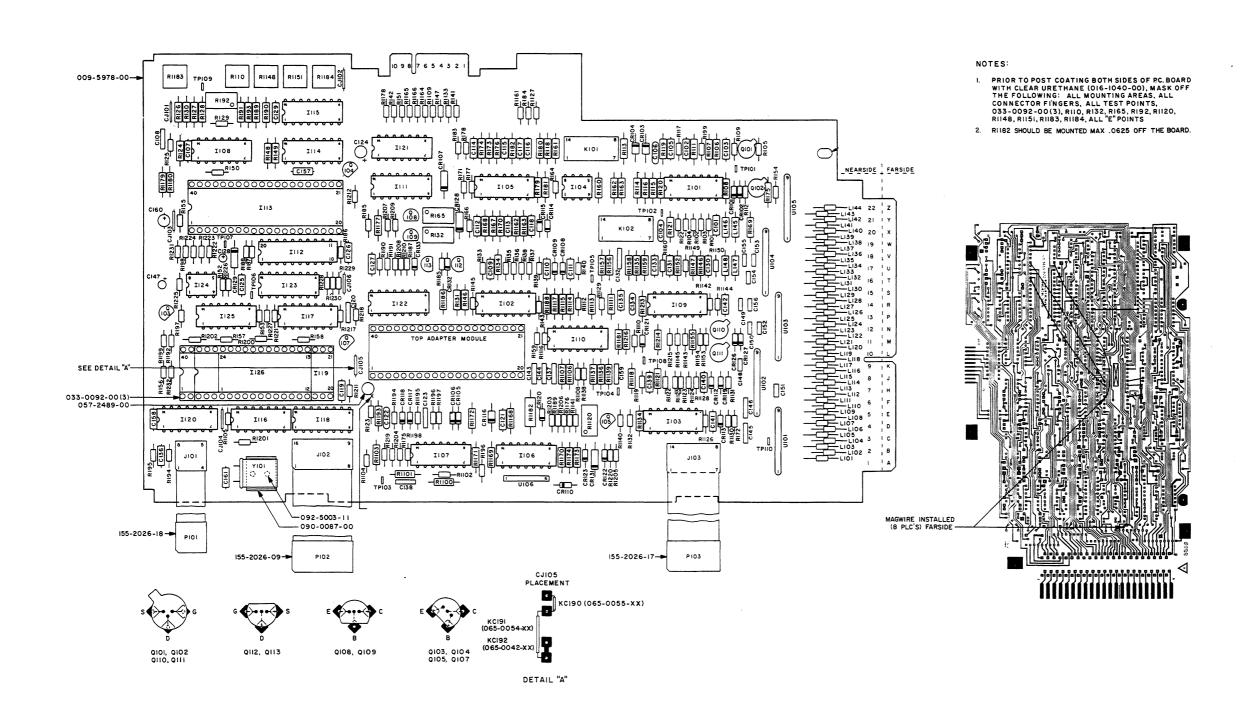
TOP BOARD ASSEMBLY (Dwg. No. 300-5978-00, R-3)
